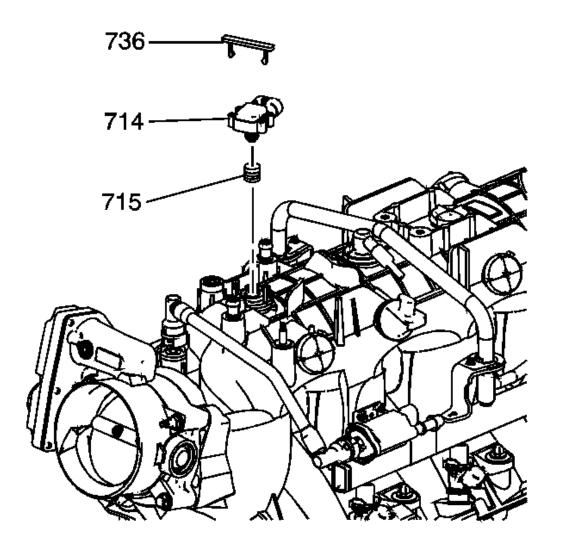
MAP Sensor Courtesy of GENERAL MOTORS CORP.
